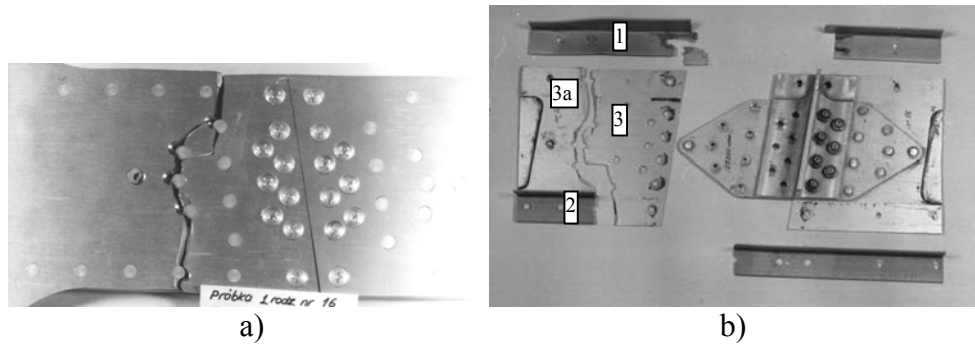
The appearance of the specimen after the test (a) and its elements (b) after partial disassembly.
